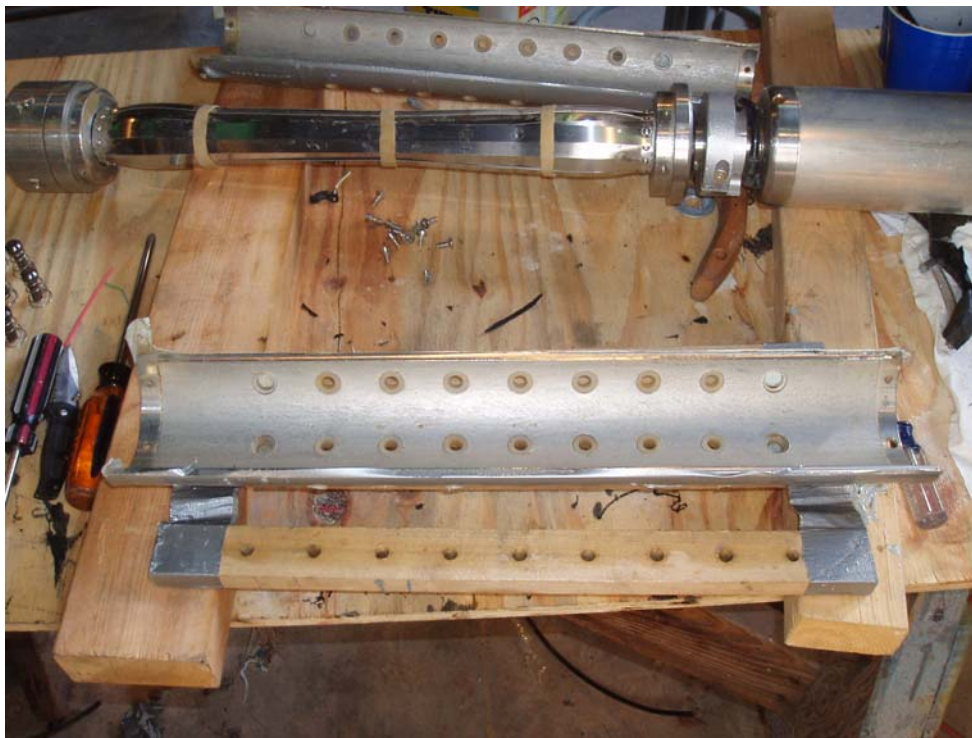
Photo Showing Disassembled RSD with Chinese Lantern and Split Chamber Cylinder.
